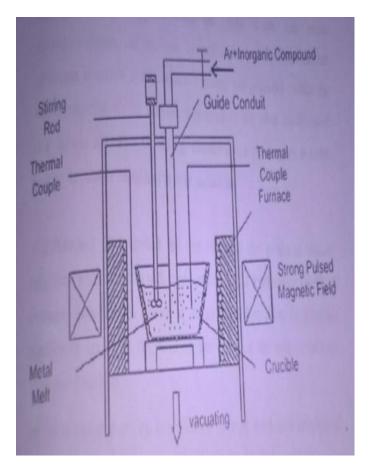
Schematic setup for fabrication of AMC Via stir casting technique
